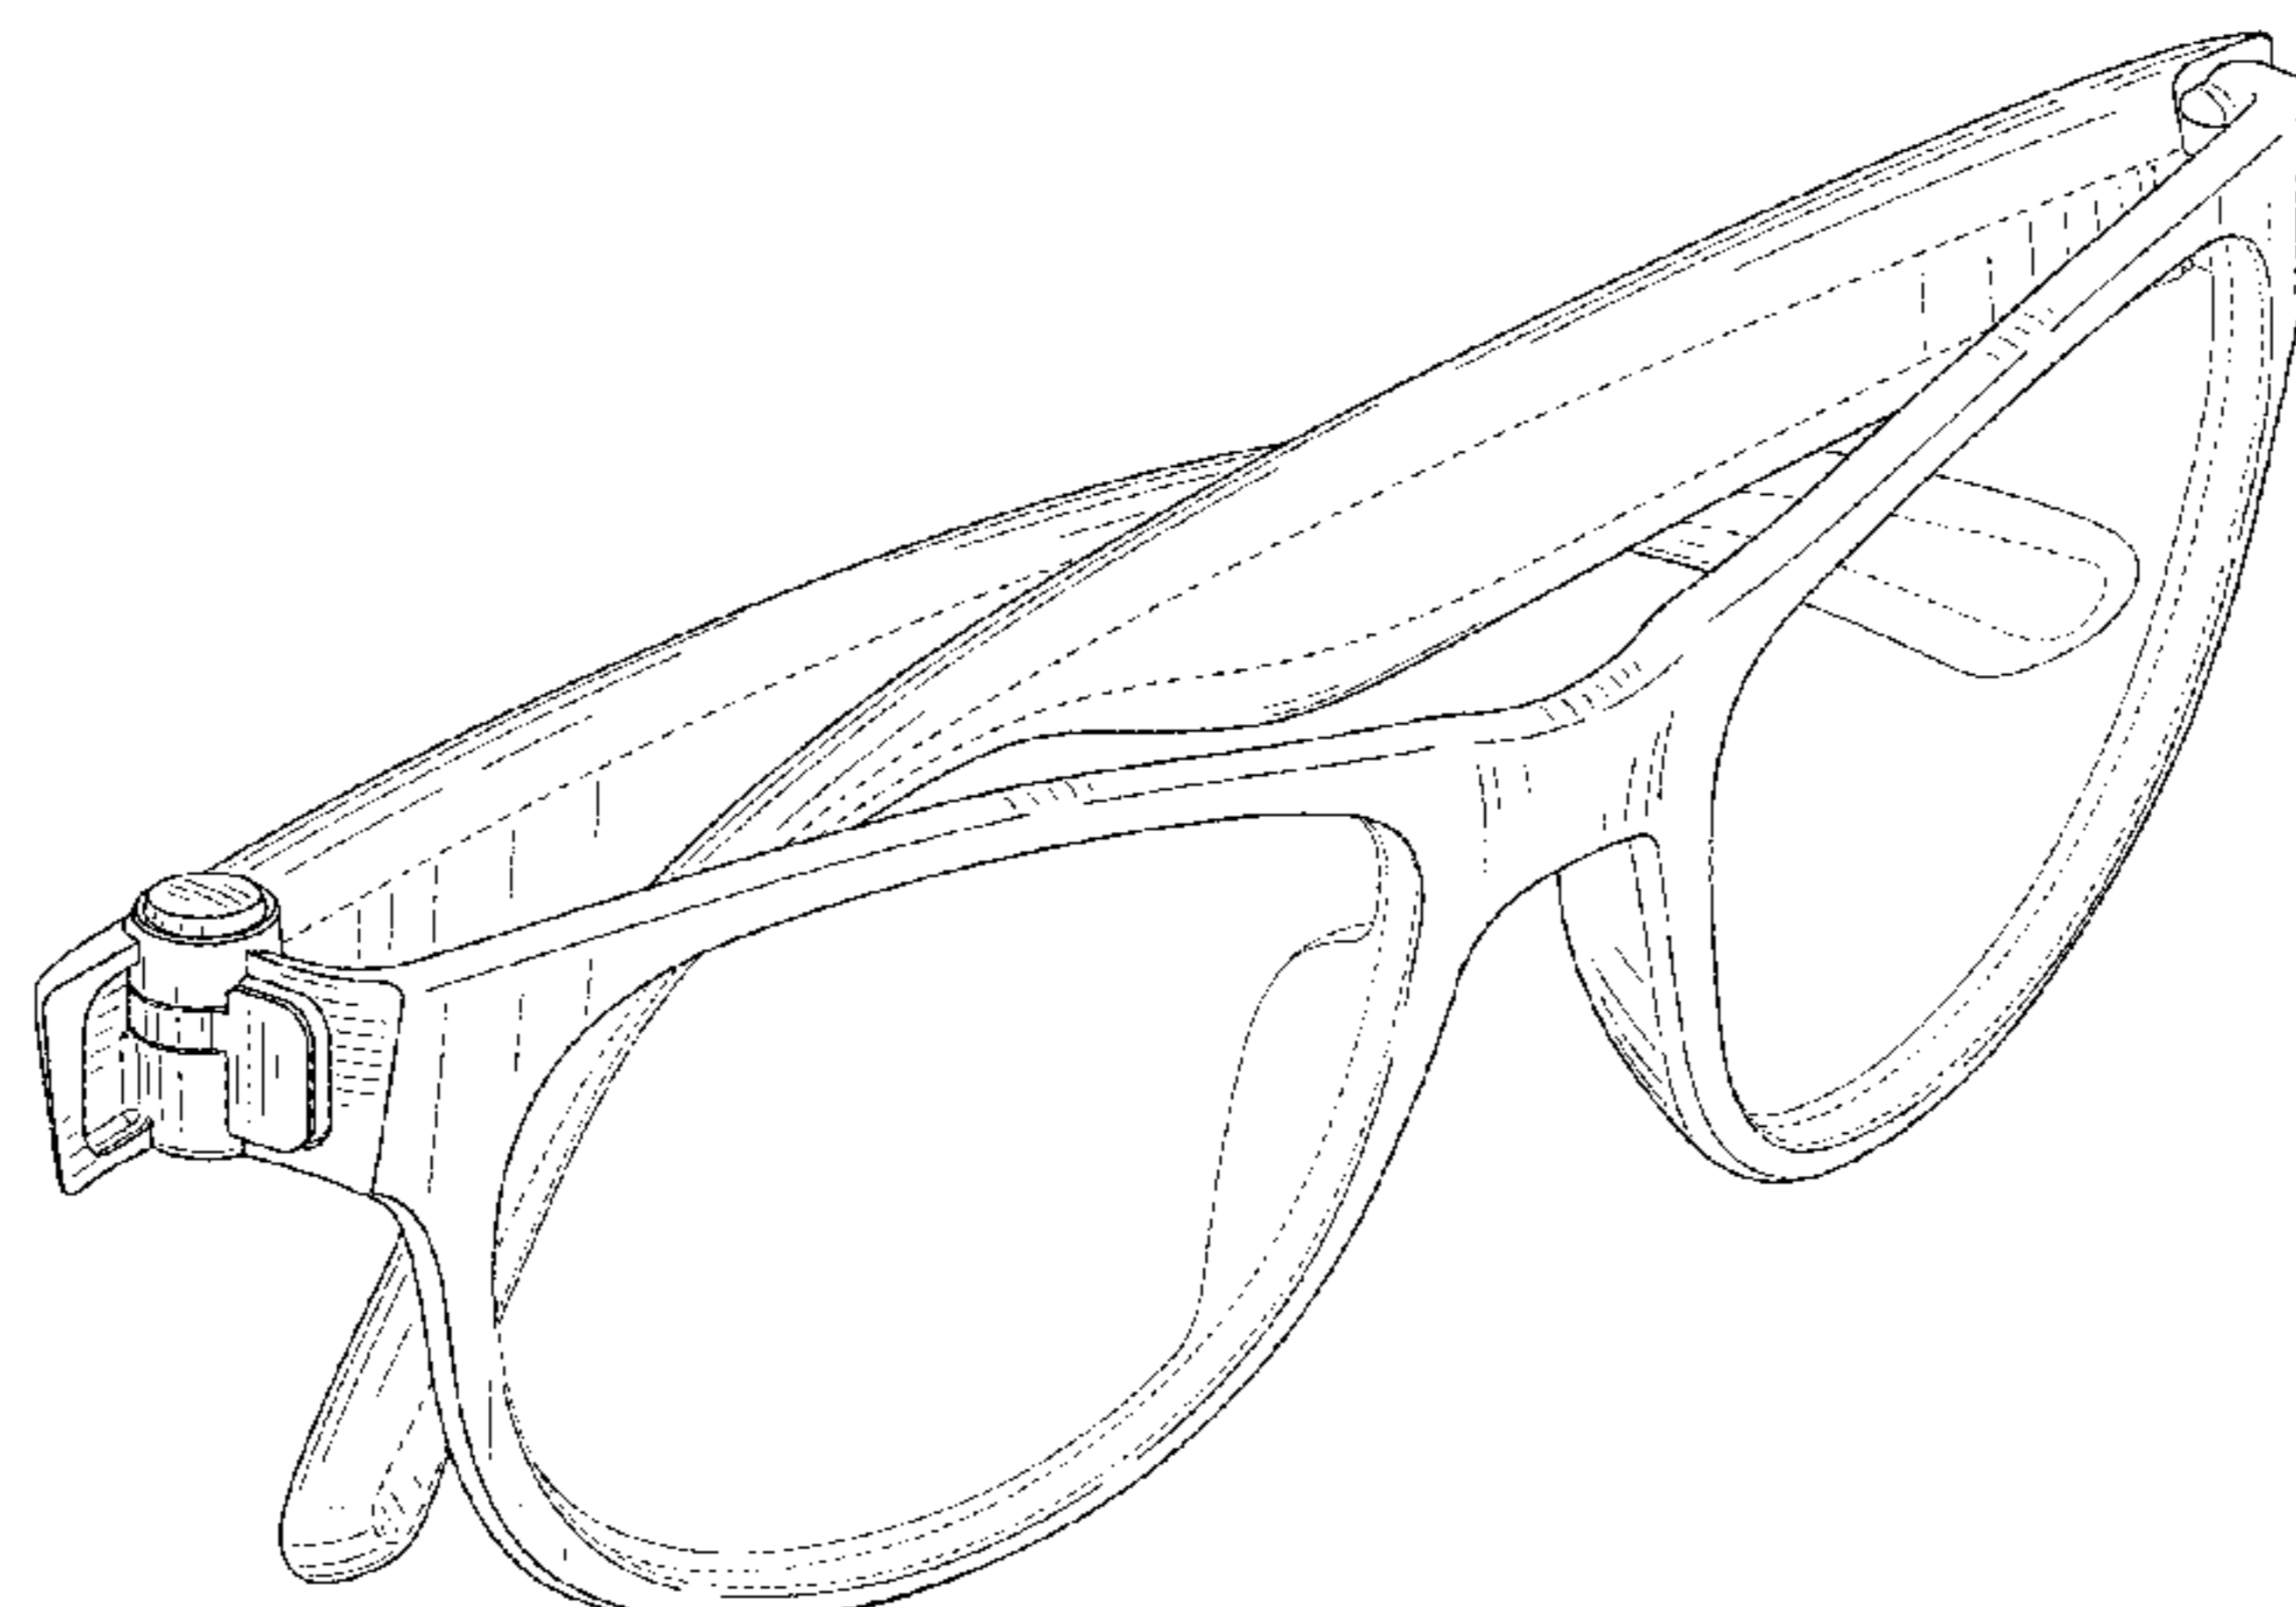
is a front perspective view of interchangeable eyewear assembly according to our design;
